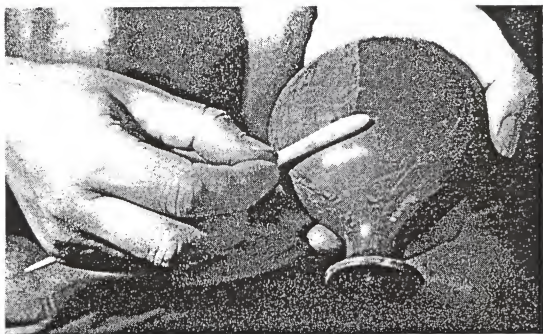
BURNISHING OR POLISHING TECHNIQUE USED ON THE SURFACE OF THE CLAY FORM.
